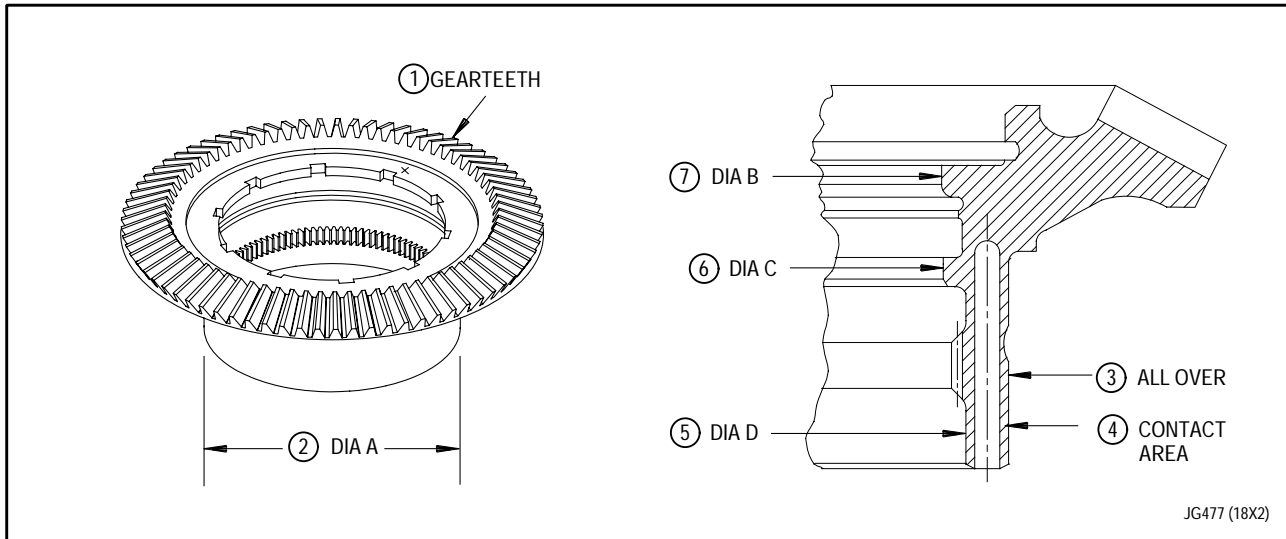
Gearbox Drive Bevel Gear (73 Teeth) - Inspection
